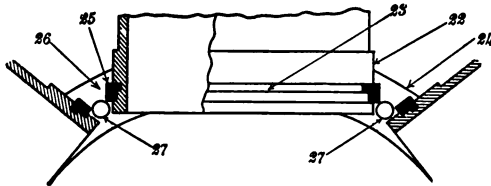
SHOWING METHOD OF ATTACHING GNOME CYLINDERS
